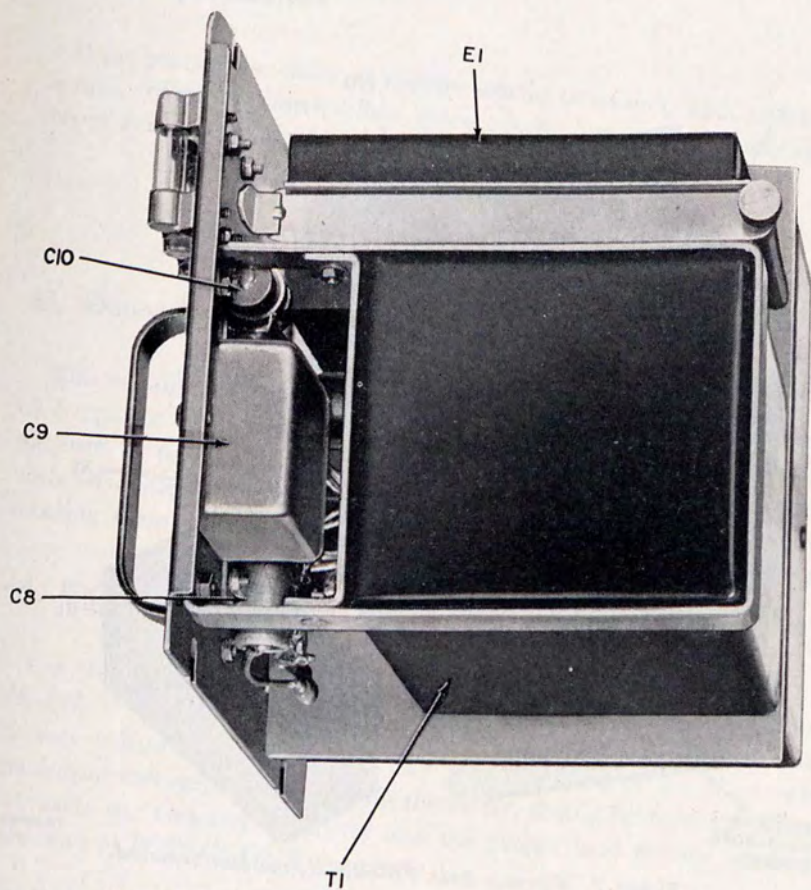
Vibrator Pack PP-68B/U, top view of chassis.
